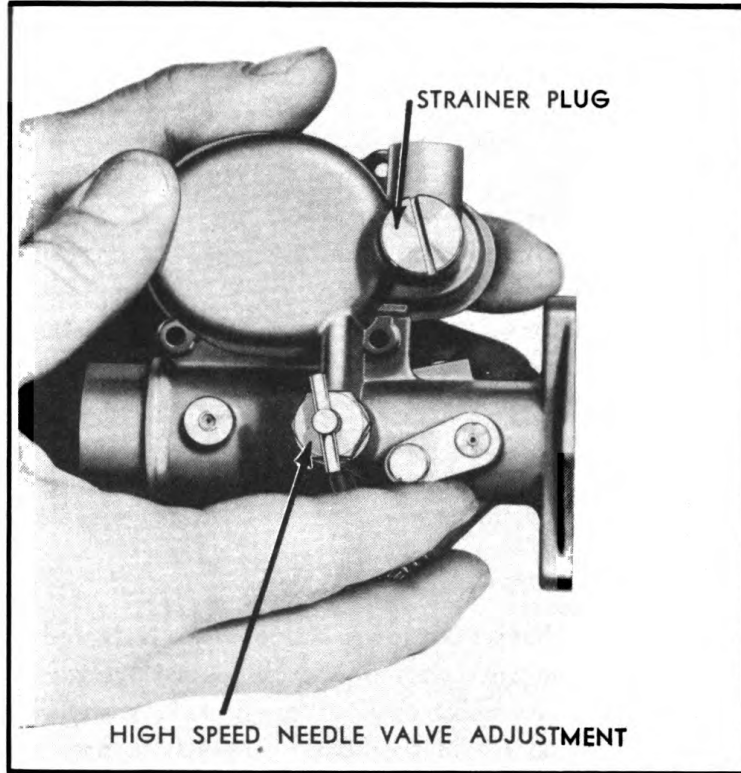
Reassembly of High Speed Needle Valve Assembly
